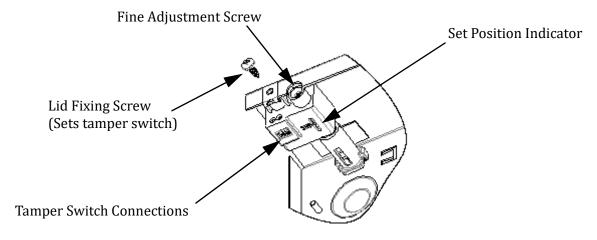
Position of G3 tamper assembly on "clam shell" style enclosures
